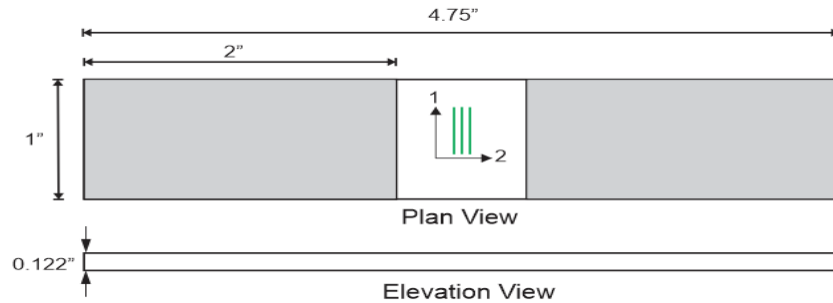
2-direction Compression Experimental Specimen Layout
